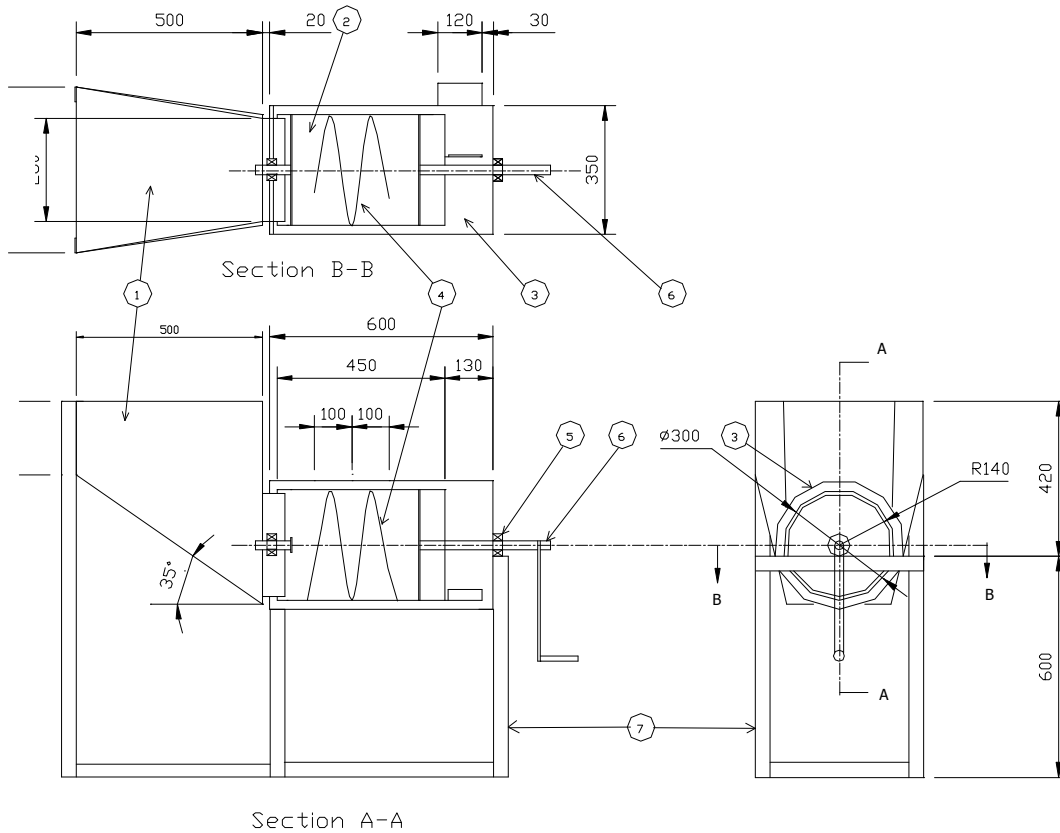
Orthographic views of the yam sett metering equipment: 1, Hopper; 2, Inner metering drum; 3, Outer drum; 4, Worm; 5, Bearing; 6, Shaft; 7, Frame
